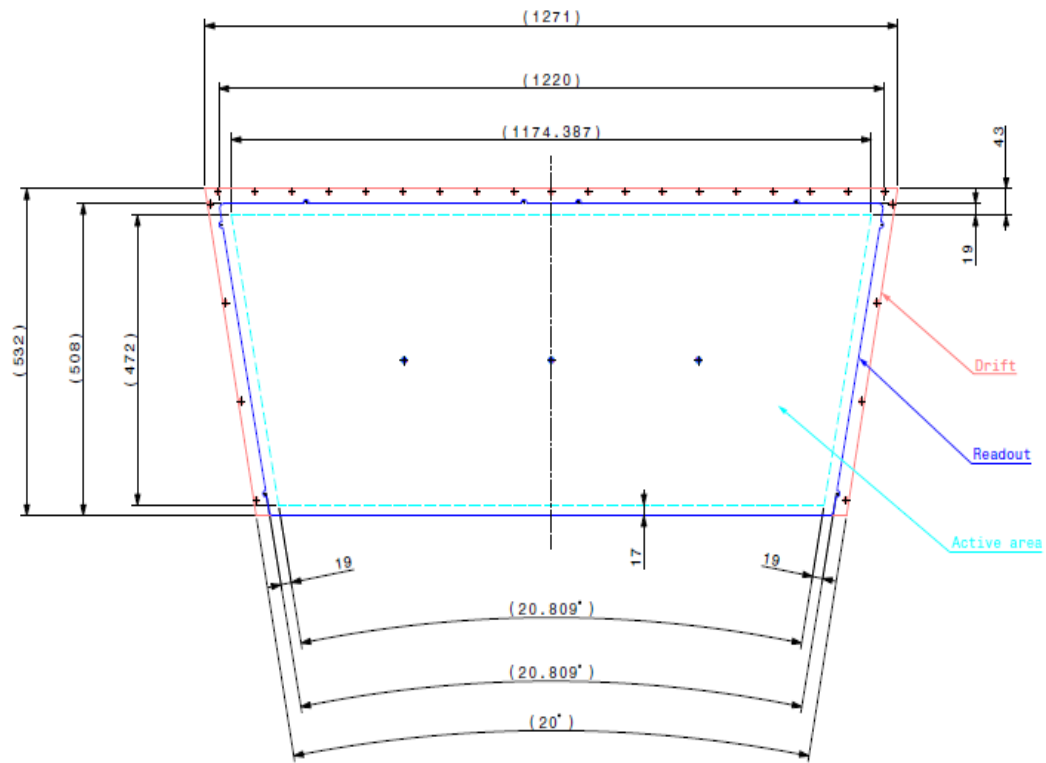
Dimensions of the drift and readout PCBs for the GE2/1 M4 back module.
